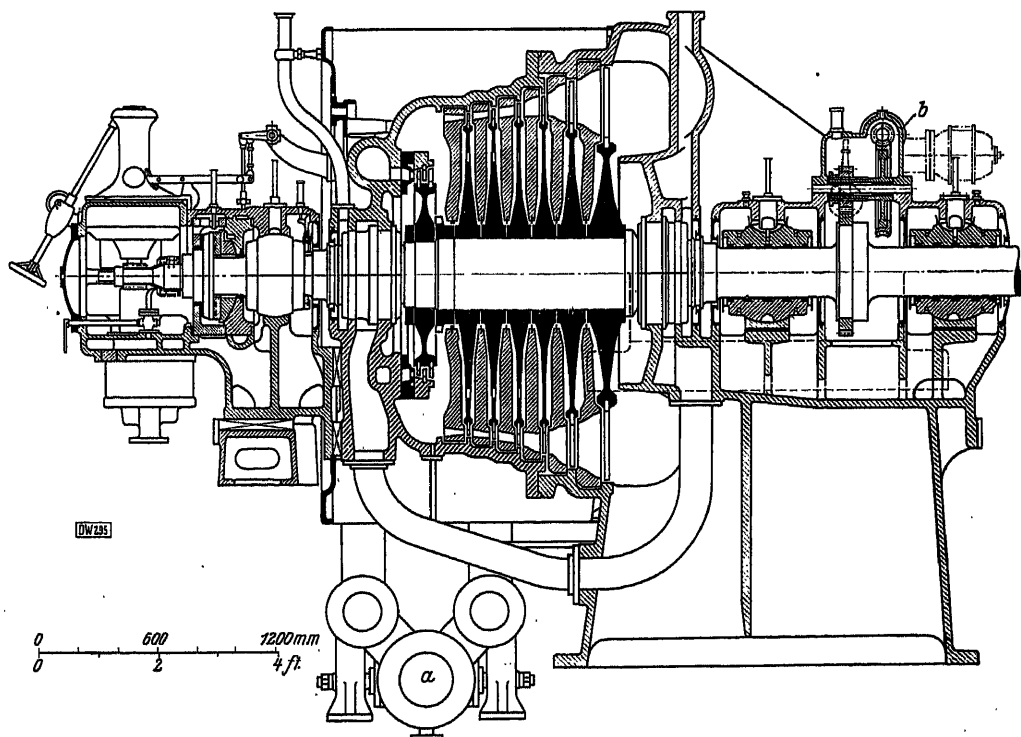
A.E.G.*, 17,500 kw., 3000 R.P.M. high-pressure turbine
